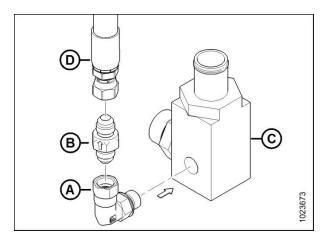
Replacement 90° Elbow Fitting (A) (MD #252837) and Check Valve Fitting (B) (MD #252838)
